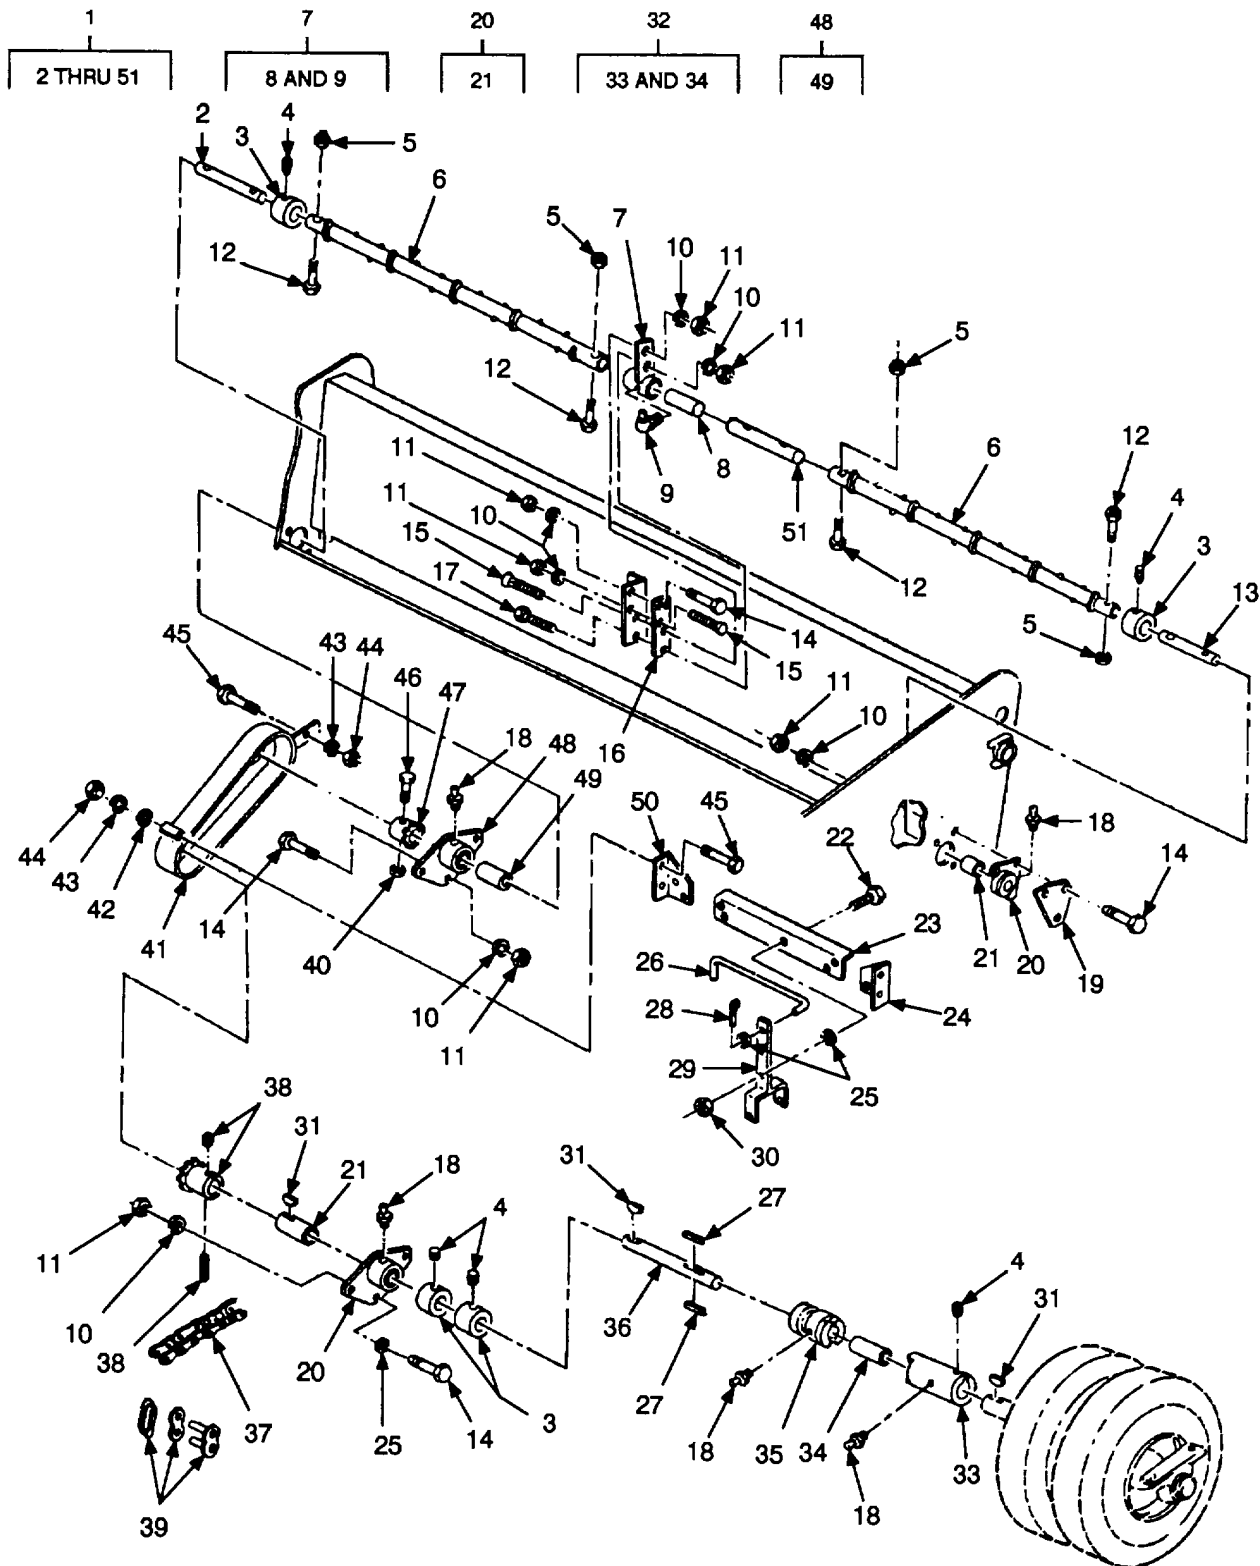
AGITATOR ASSEMBLY AND RELATED PARTS.
